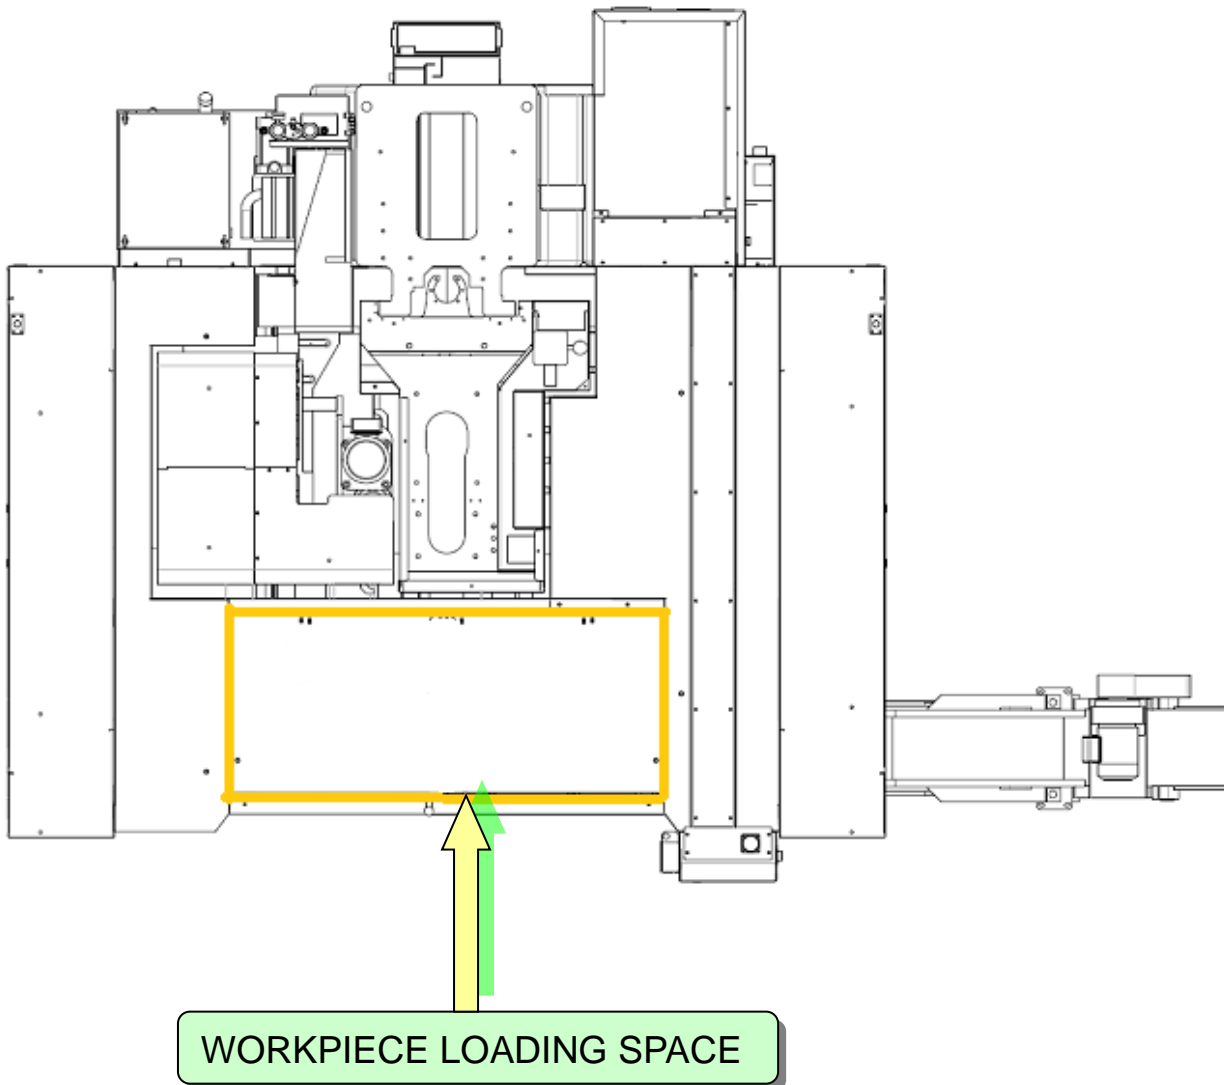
POSITION OF WORKPIECE ATTACHMENT AND DETACHMENT
